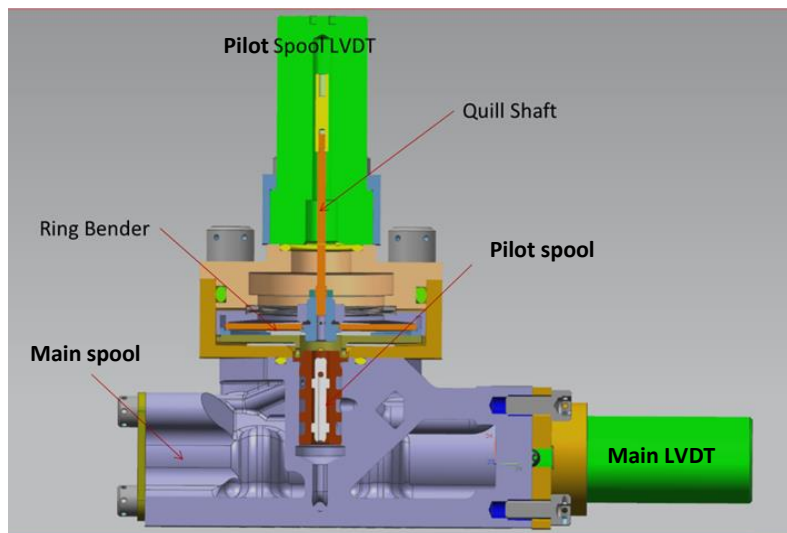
Piezo ring bender actuated pilot spool in two-stage EFB valve /22/
